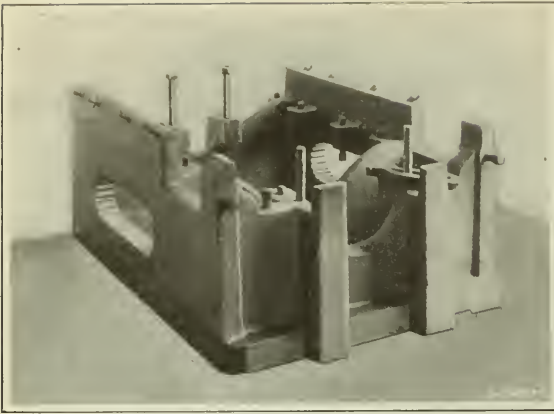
Planer Fixture in which Carriage is held while planing Ways, Cross-slide Lever Bosses and Other Surfaces on Under Side
